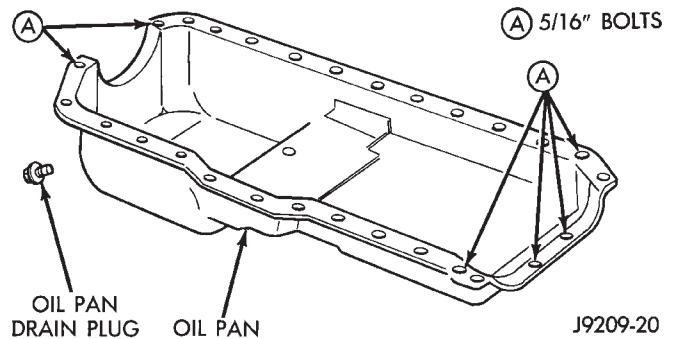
Position of 5/16 inch Oil Pan Bolts
